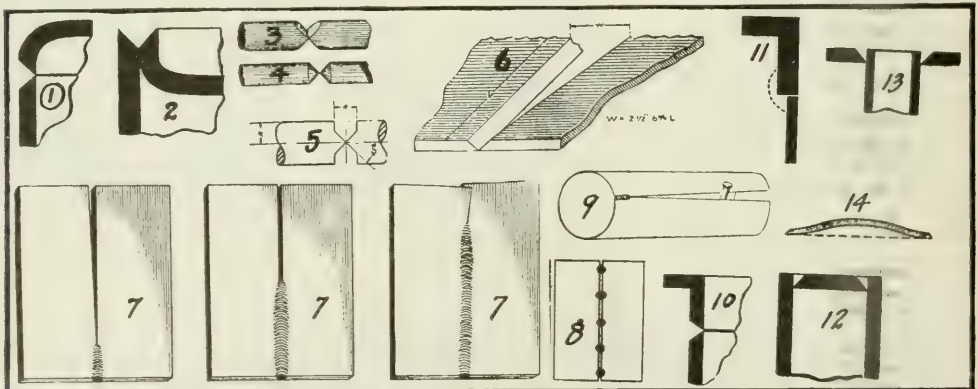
Joint for convex end on cylinder. Fig. 2—Joint for concave end. Fig. 3—Correct method of preparing shaft for welding. Fig. 4—Incorrect method. Fig. 5—Method of bevelling shaft over 2" diameter. Fig. 6—Sheets spread for welding to allow for draw. Fig. 7—Effects of not spreading sheets. First they spread, about the middle they close again, and beyond the middle they draw and lap.
